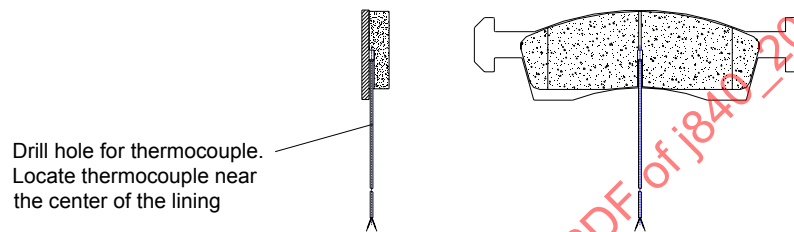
DRAWING OF THERMOCOUPLE LOCATION - DISC BRAKE
